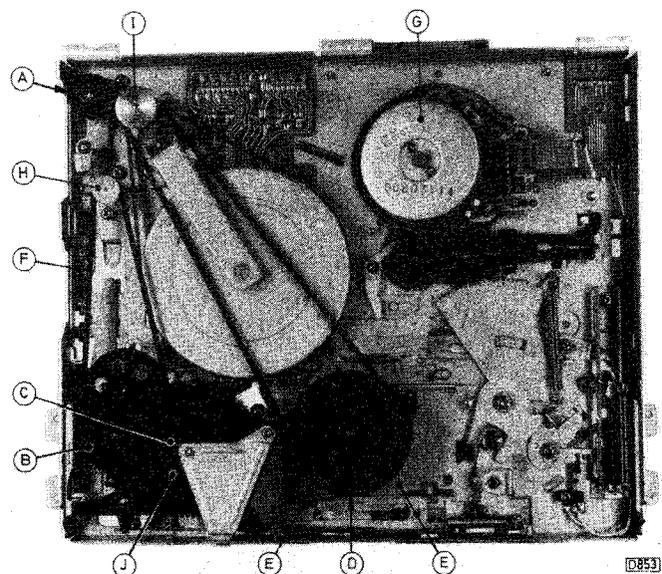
View of the lower deck. Key: A cassette lift drive pulley; B loading gears; C main cam; D spool drive pulley; E forward/rewind spool drive gears; F loading belt; G drum motor; H loading motor pulley; I capstan motor pulley; J mode switch (beneath cam).
